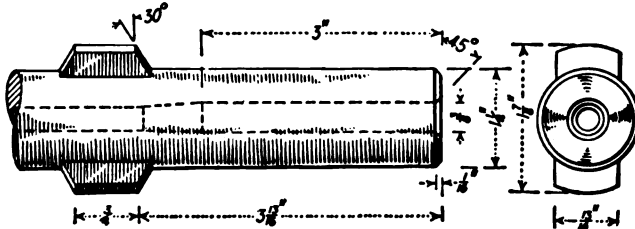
Standard Lugged Drill Shank for Mounted Hammer Drills
